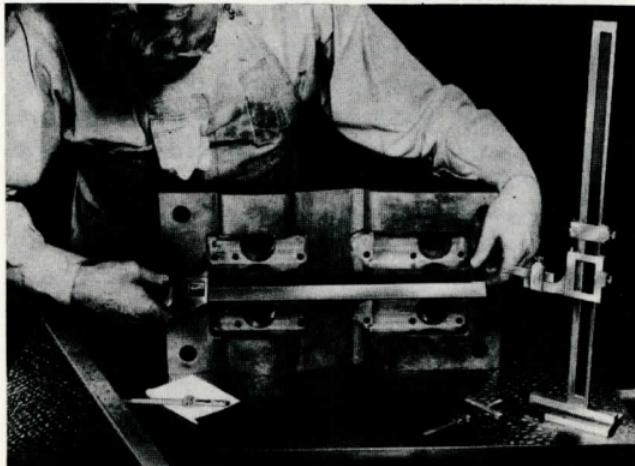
Using a Vernier Caliper to check dimensions of a drawing die. The mechanic is making a fine adjustment of the jaw by means of the adjusting nut and screw which connects the two slides. Other precision measurements are made with the Vernier Height Gage and the Vernier Depth Gage in the foreground.
